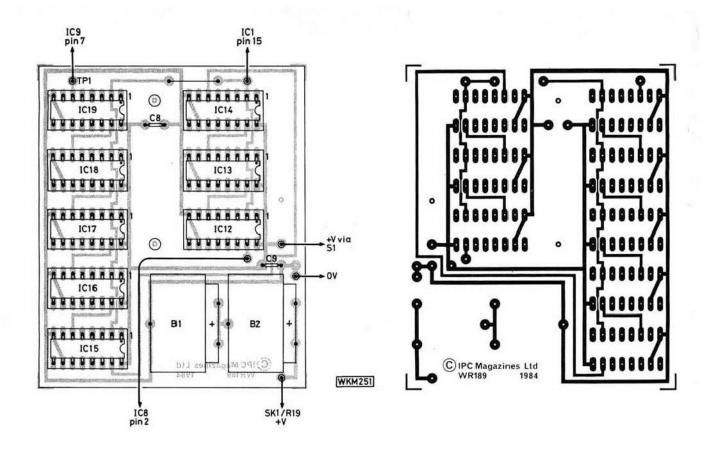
Full size p.c.b. track pattern (lower non-component side) and component placement diagram of the doublesided control board. Ensure all through-board links are soldered to the pads provided, taking particular care with those located underneath i.c. sockets which are virtually impossible to check once the sockets are installed
